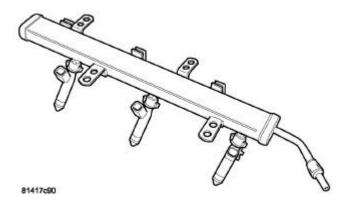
FUEL RAIL ASSEMBLY Courtesy of CHRYSLER LLC
